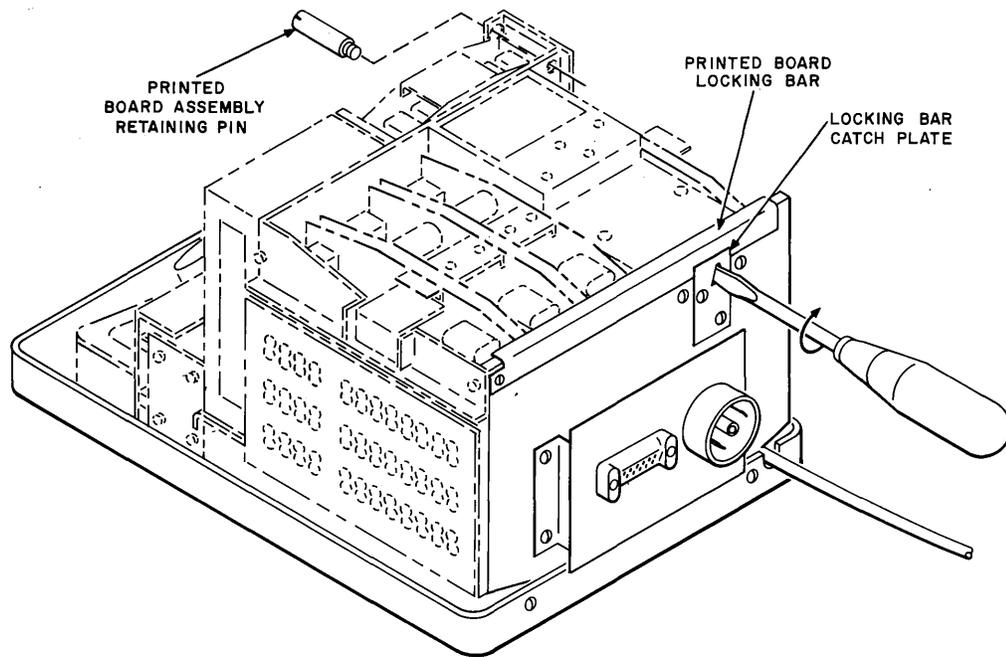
Printed Board Assembly—Pivoted Retaining Bracket
